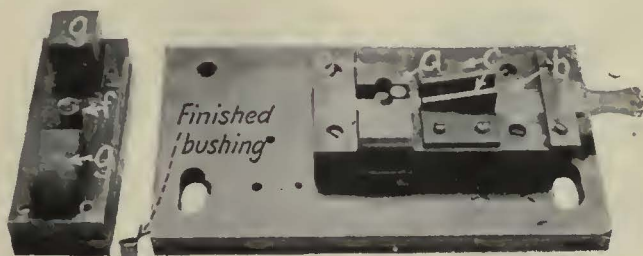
Die for Rolling Bead on Push-Button Bushings
